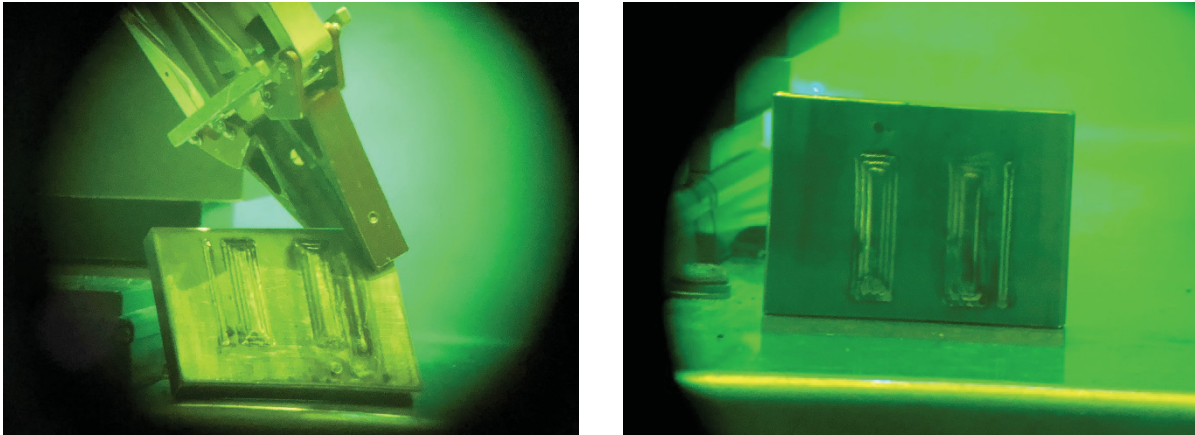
Advanced laser welds on the irradiated 304C-5 coupon (left) and 316C-7 coupon (right)
